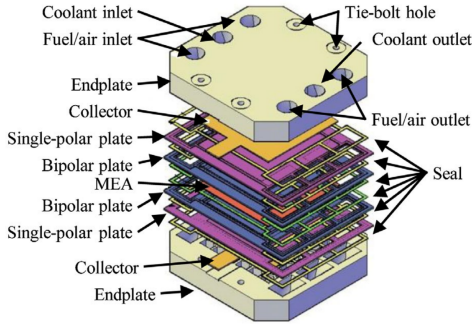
PEMFC stack assembly showing bipolar plates, MEA, seals, end plates, manifolds and tie bolts.
